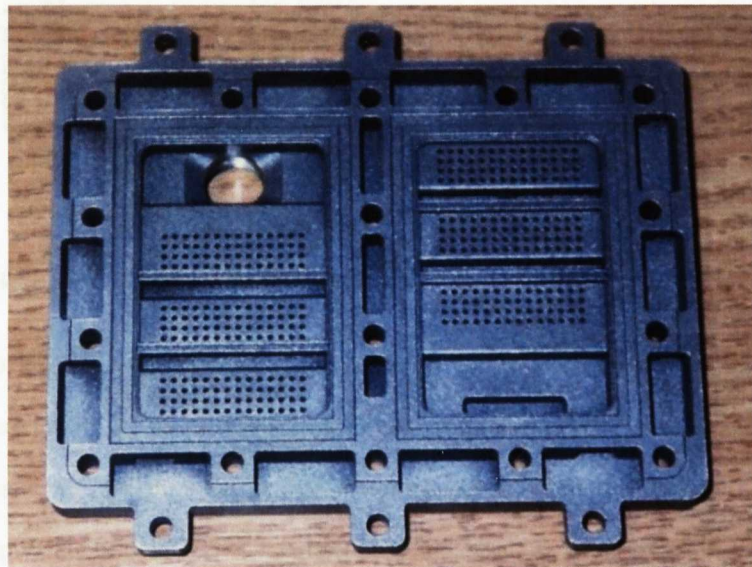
Direct substrate jet impingement cooler with 6 impingement cells, manufactured from stainless steel using a laser sintering process.
